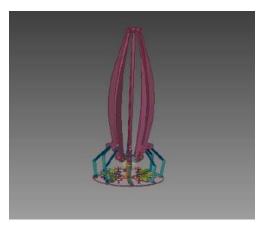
Assembly of the Antenna Structure - Stowed condition
